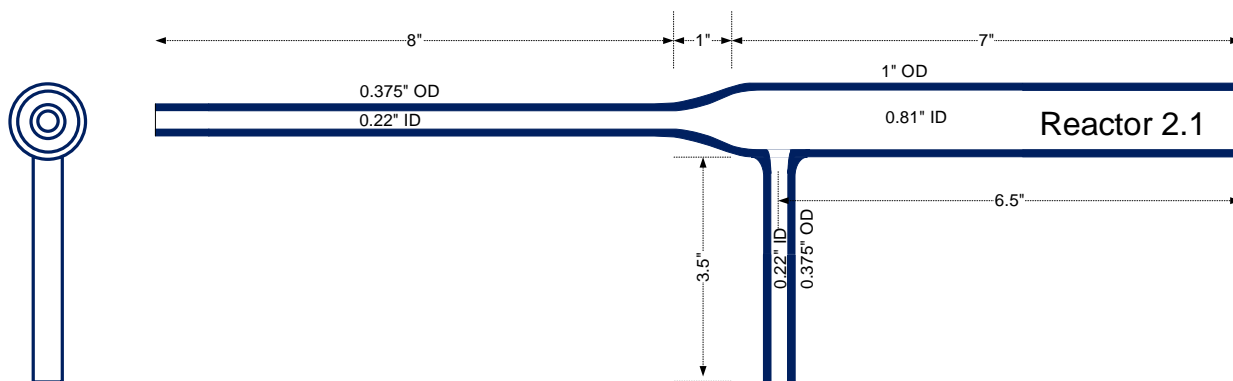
Sideport 2.1 Reactor Tube Dimensions
